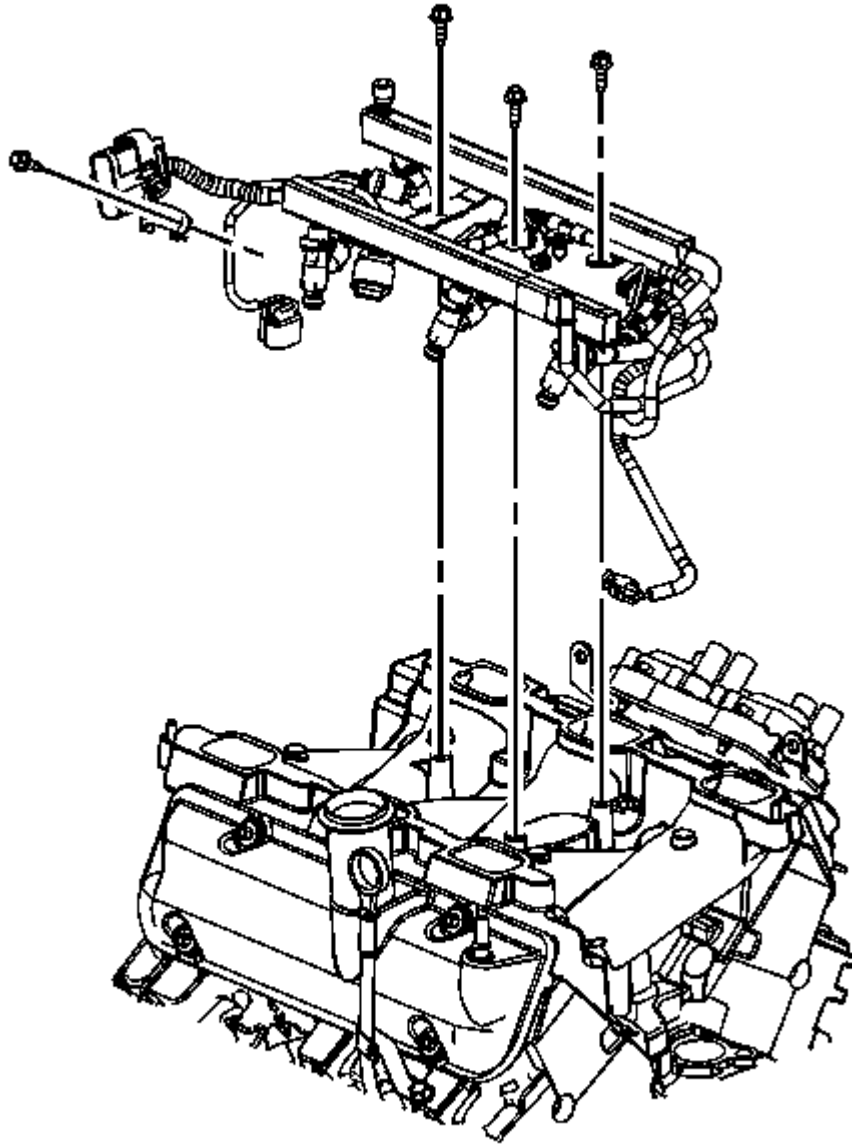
View Of Fuel Rail Assembly & Intake Manifold
